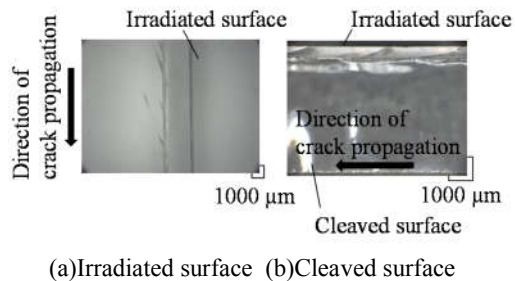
Image of cleaved surfaces and laser irradiated surfaces obtained by cleaving with laser power of 39.4 W
